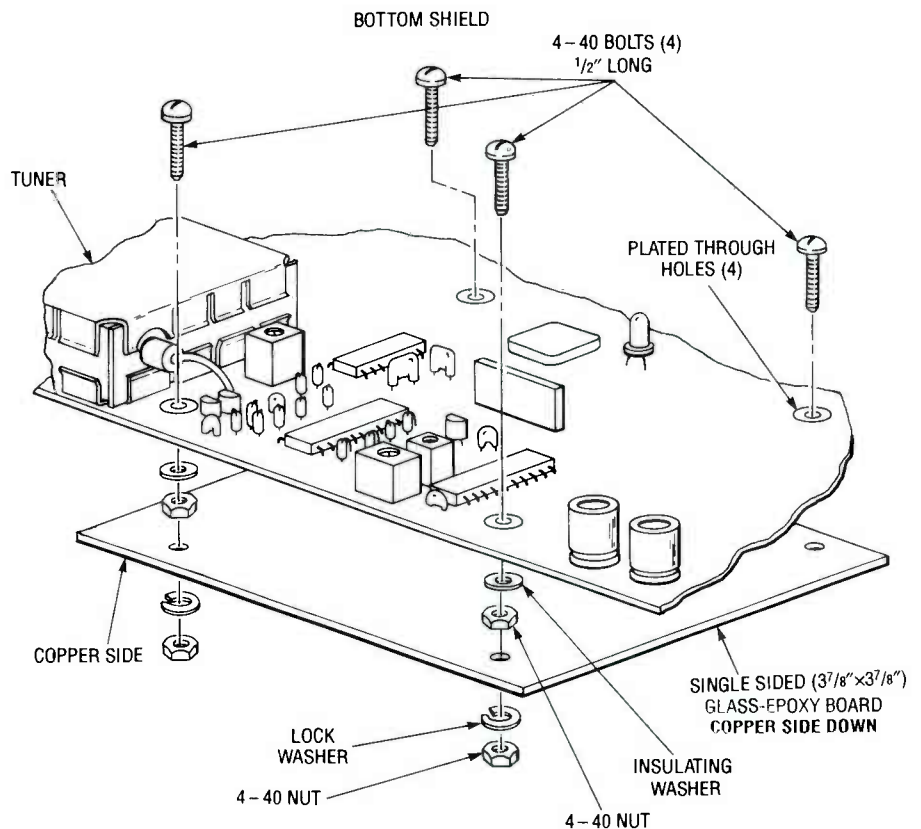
THE BOTTOM SHIELD ASSEMBLY is shown here. Make sure the copper side of the shield is installed away from the PC board.
